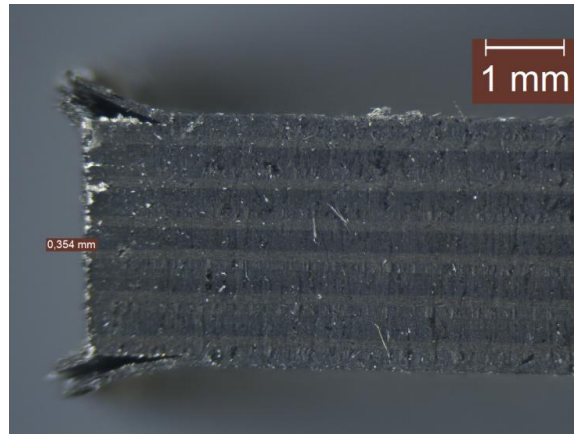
Front view of workpiece .Test E17: $V_c = 200\text{m/min}$, depth = 0.2mm
